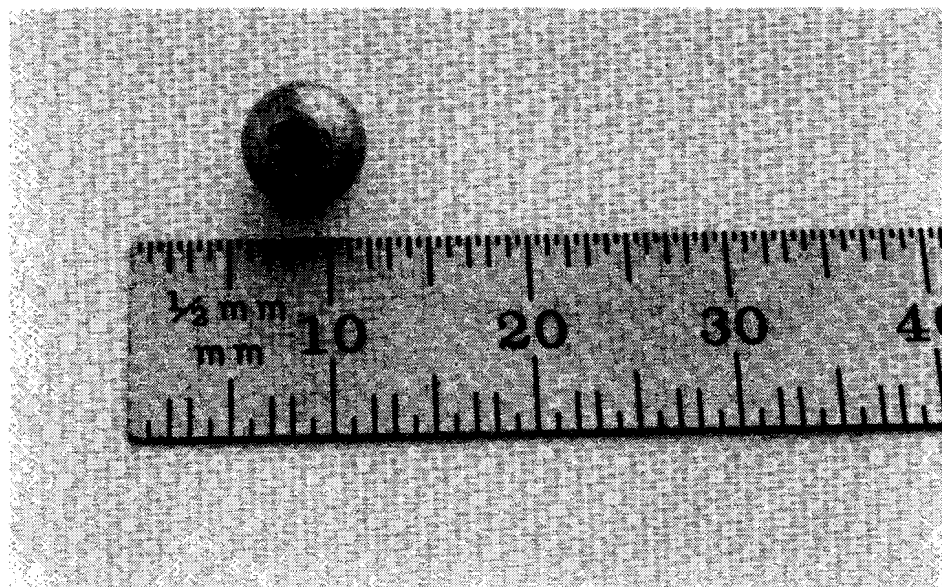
90-Degree Gearbox -410 Bearing Ball C/D Fault, Runs 10A + 10B
